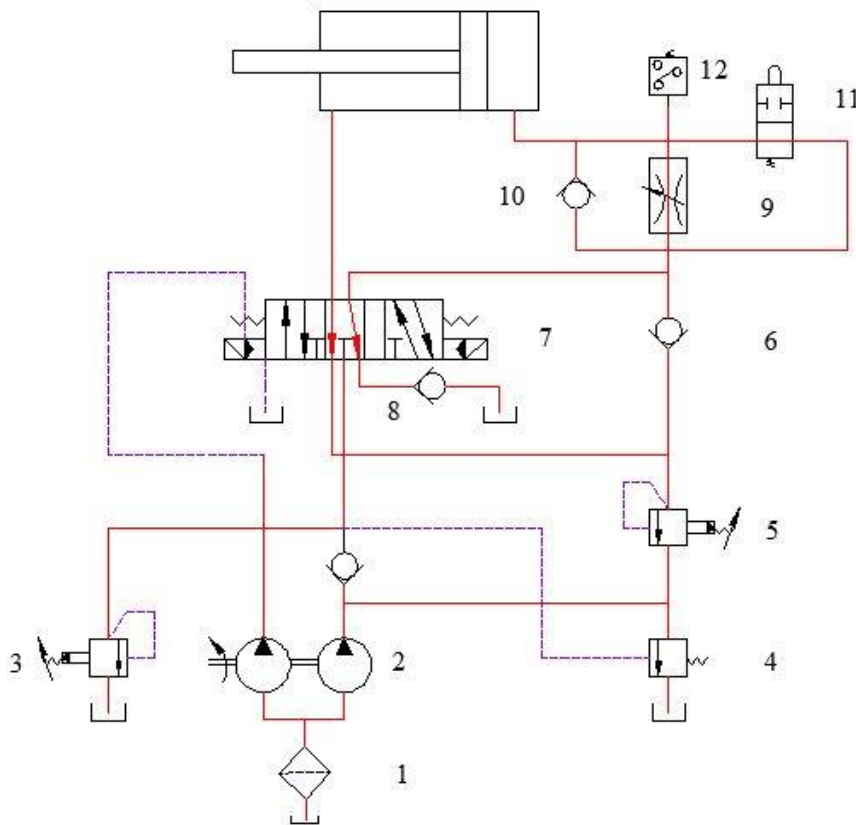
Diagram of hydraulic cylinder working condition of combined machine tool
